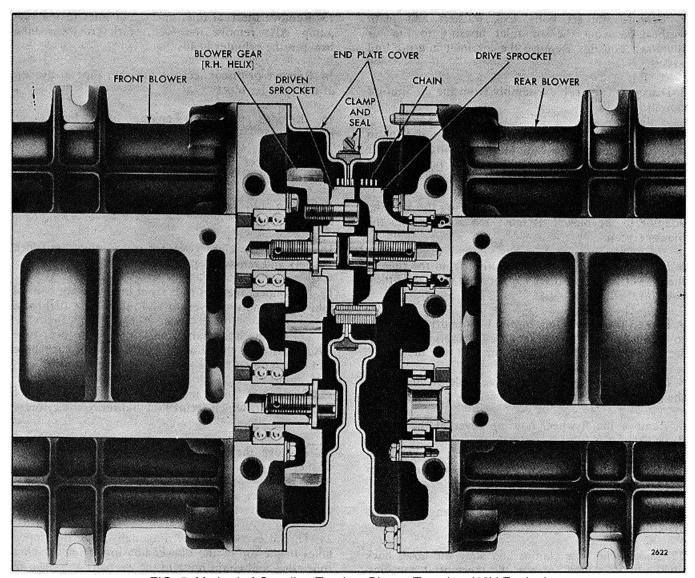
Method of Coupling Tandem Blower Together (12V Engine)
